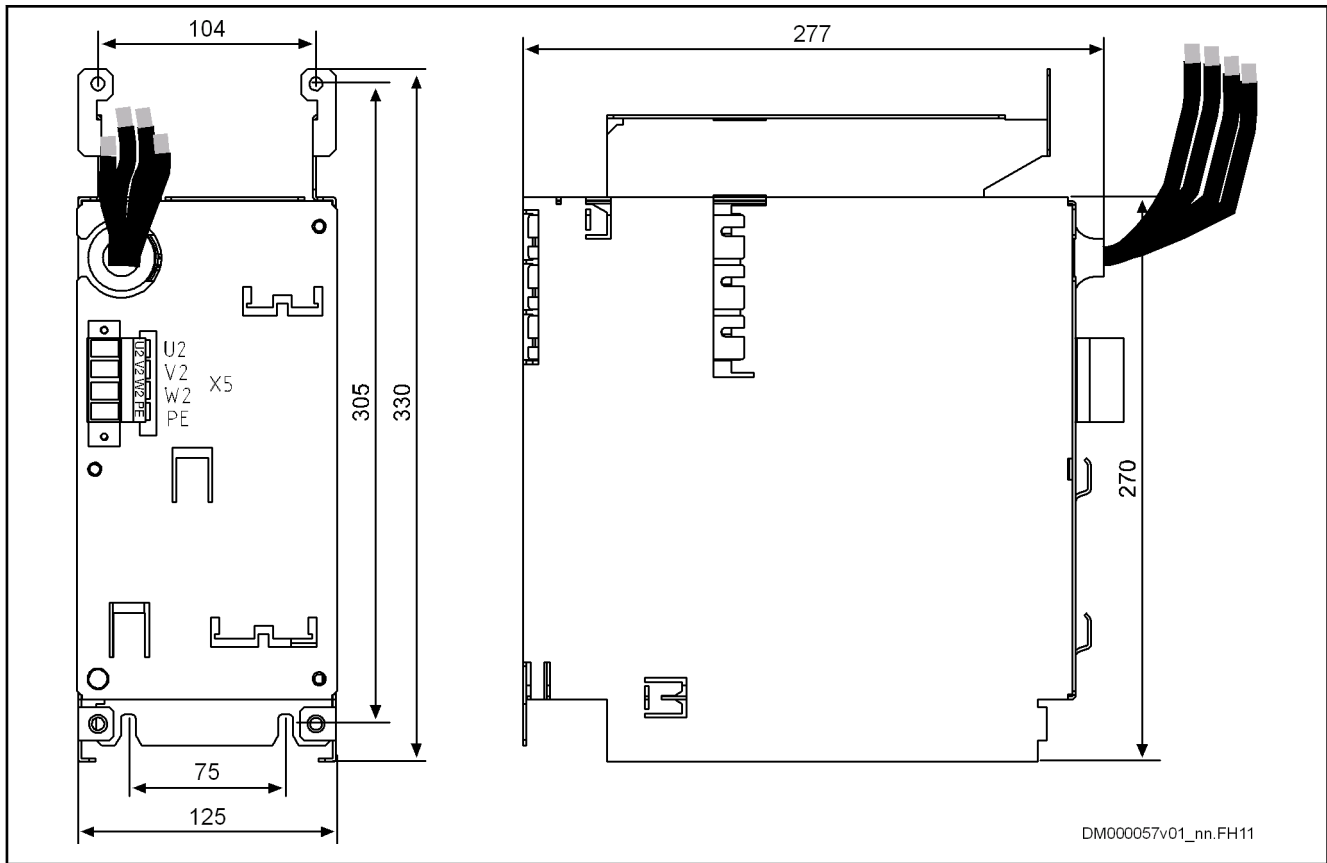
Motor filter HMF01.1A-N0K2-M0028-A-500-NNNN dimensions
